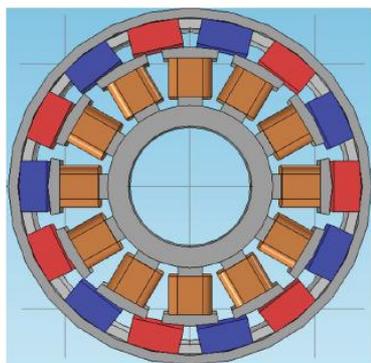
Basic components of the demonstrator machine: 14-pole outer rotor and inner stator with 12 slots and distributed LRK winding.
